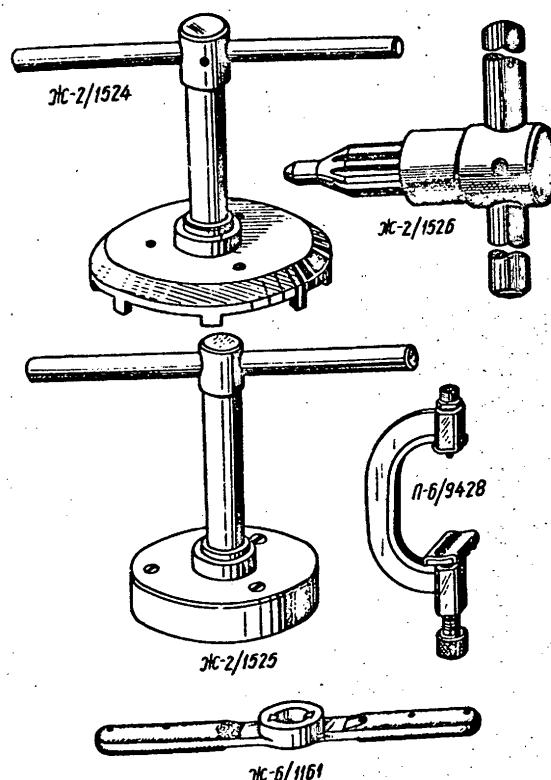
TOOLS FOR ASSEMBLY OF CRANKCASE NOSE-PIECE AND ENGAGEMENT CLUTCH
